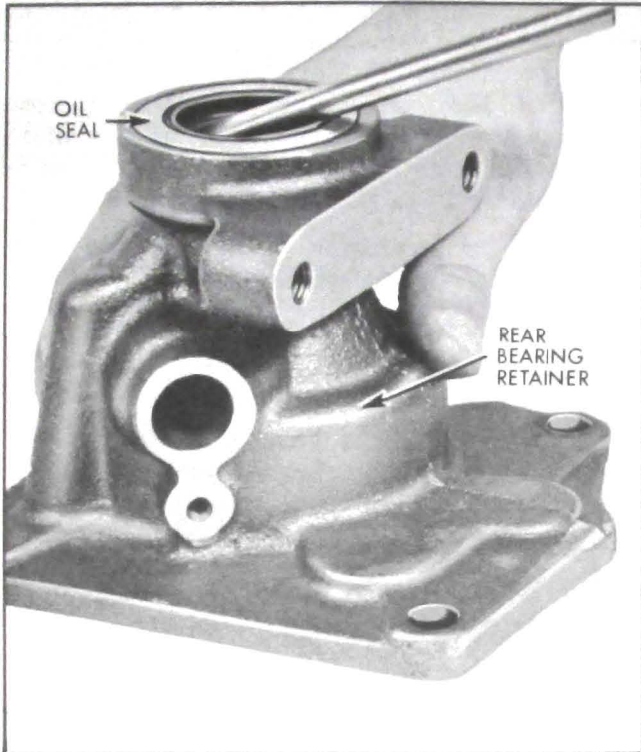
Removing Rear Bearing Retainer Oil Seal
